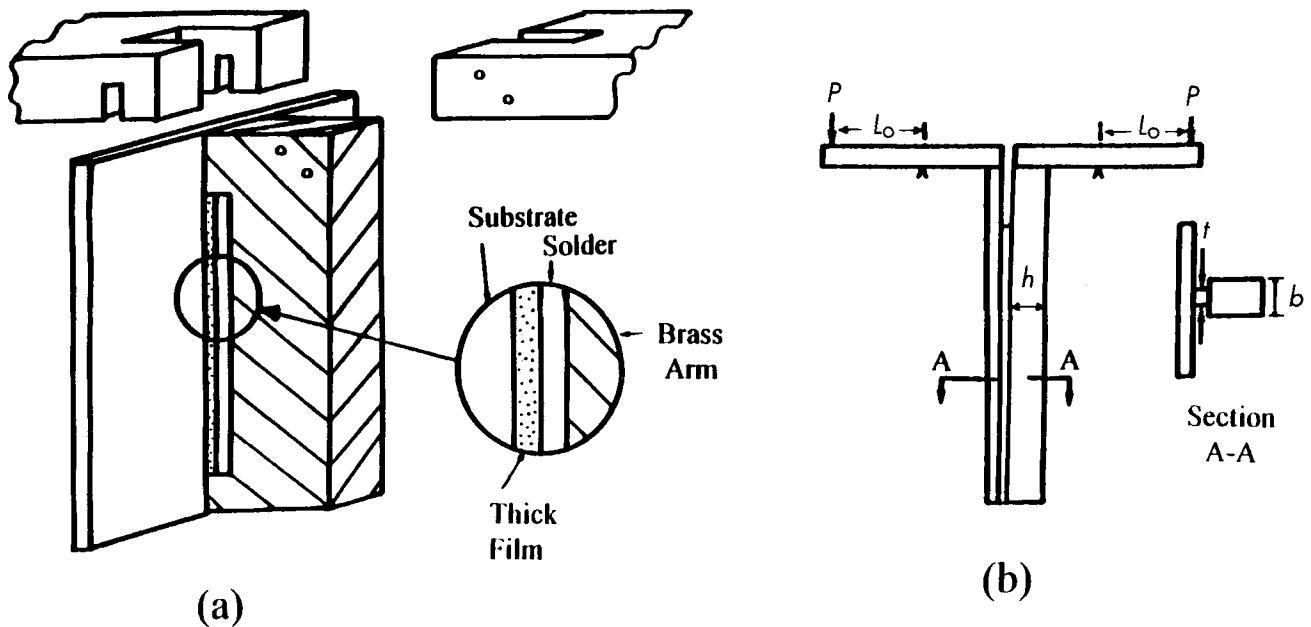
Applied-moment DCB specimen for measuring the adhesion of thick films. (a) Specimen preparation. (b) Testing arrangement. Source: Ref 44
